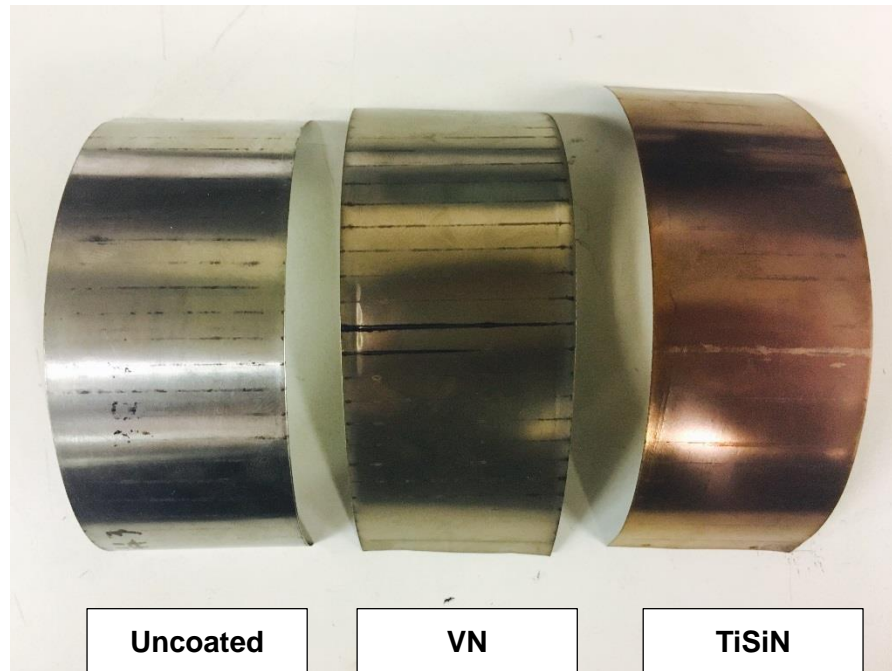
Wear marks on the back side of the test top foils evidencing the Coulomb damping. Post-test inspection.
